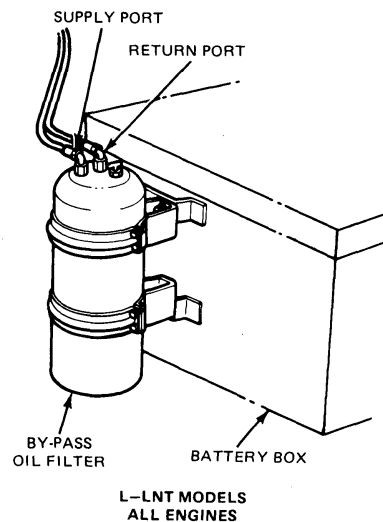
By-Pass Oil Filter Installation Battery Box Mounted
